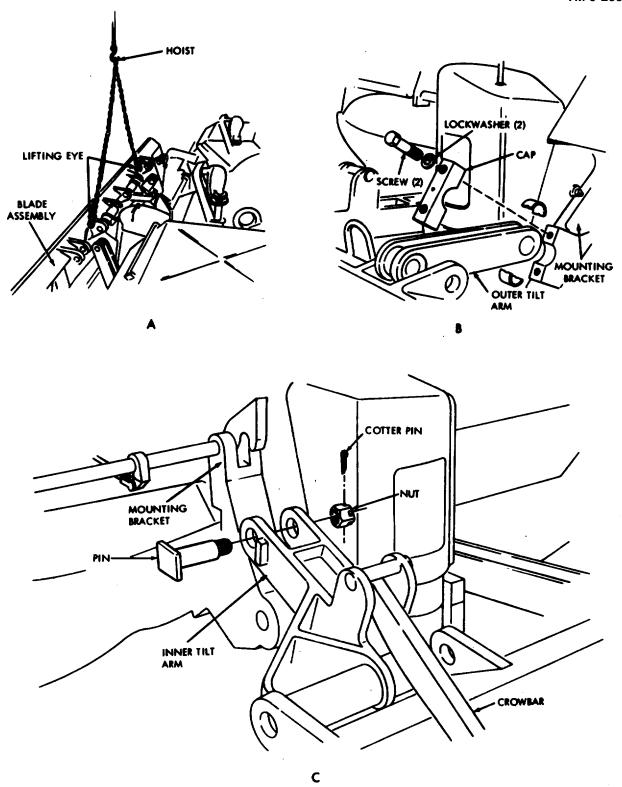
Removal or Installation of blade assembly (sheet 1 of 2).
